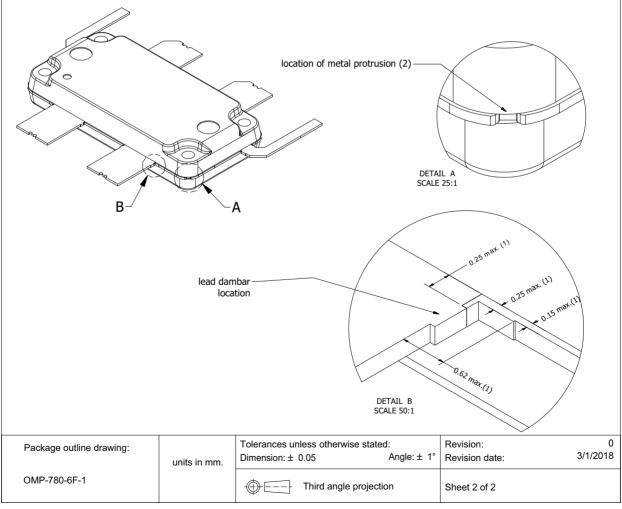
Package outline OMP-780-6F-1 (sheet 2 of 2)
